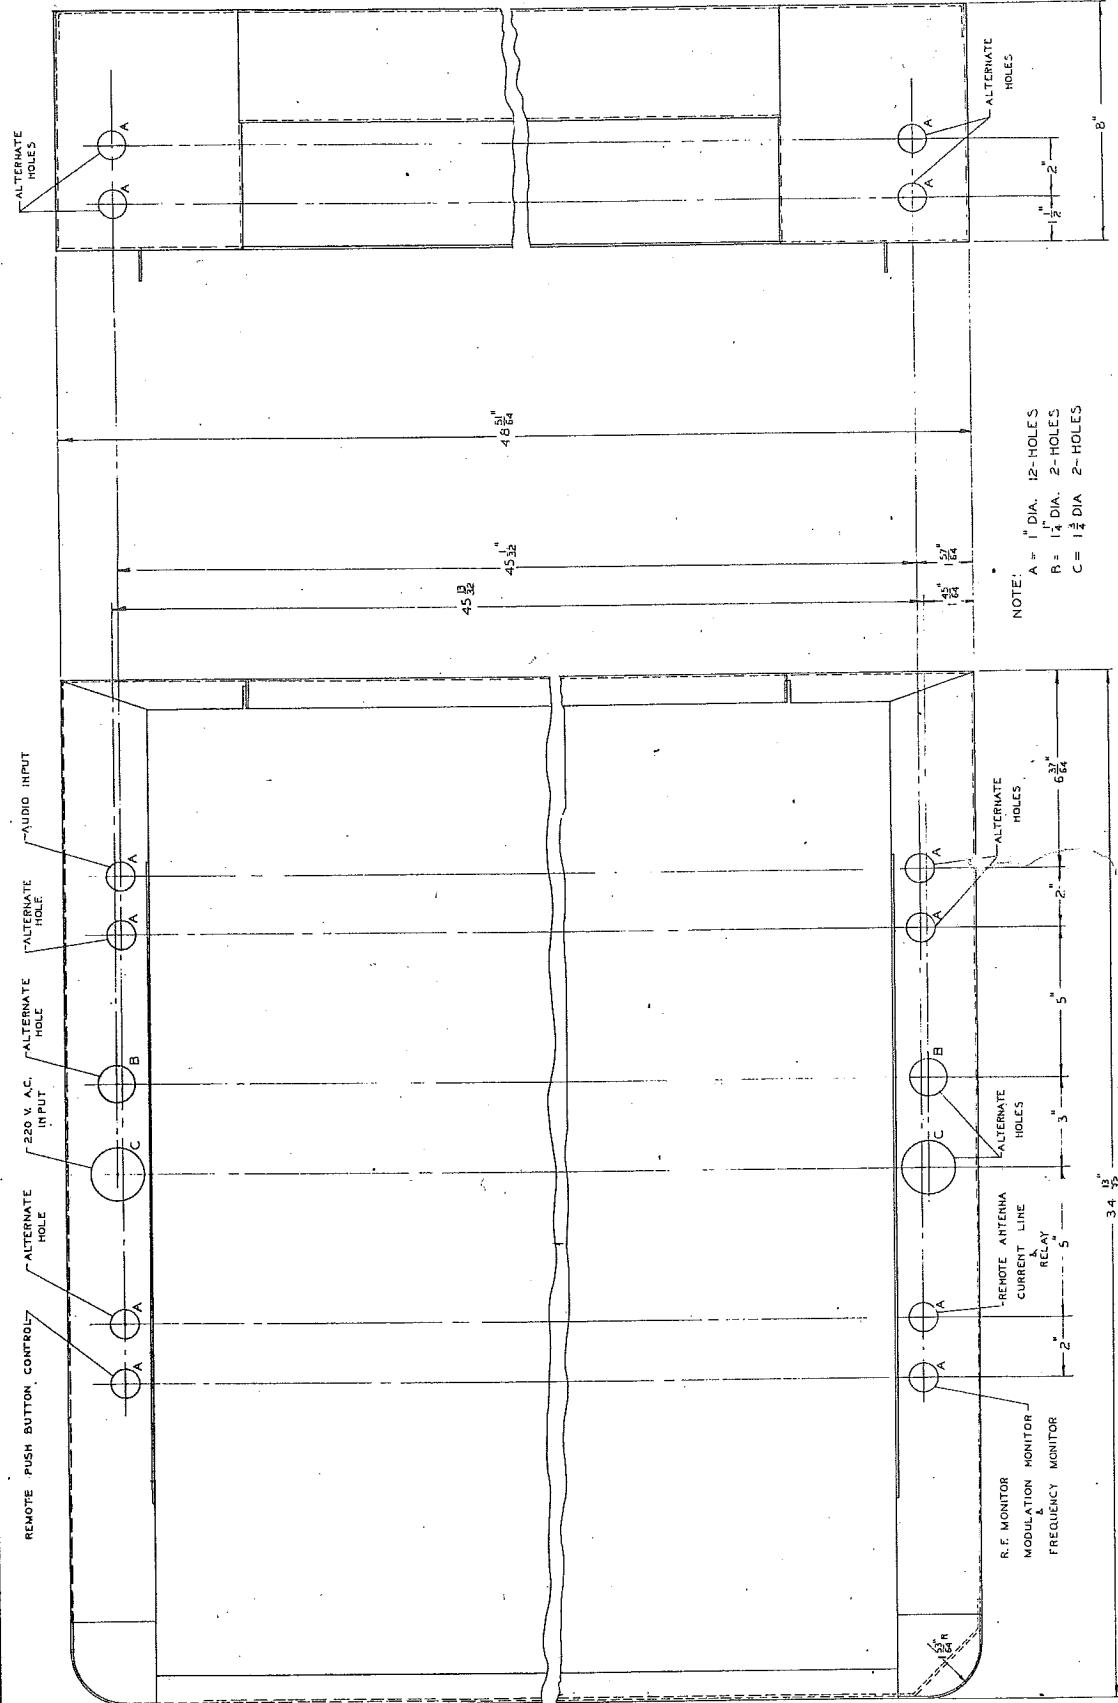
RF DRIVER 813 TUBE CHASSIS (BOTTOM)
